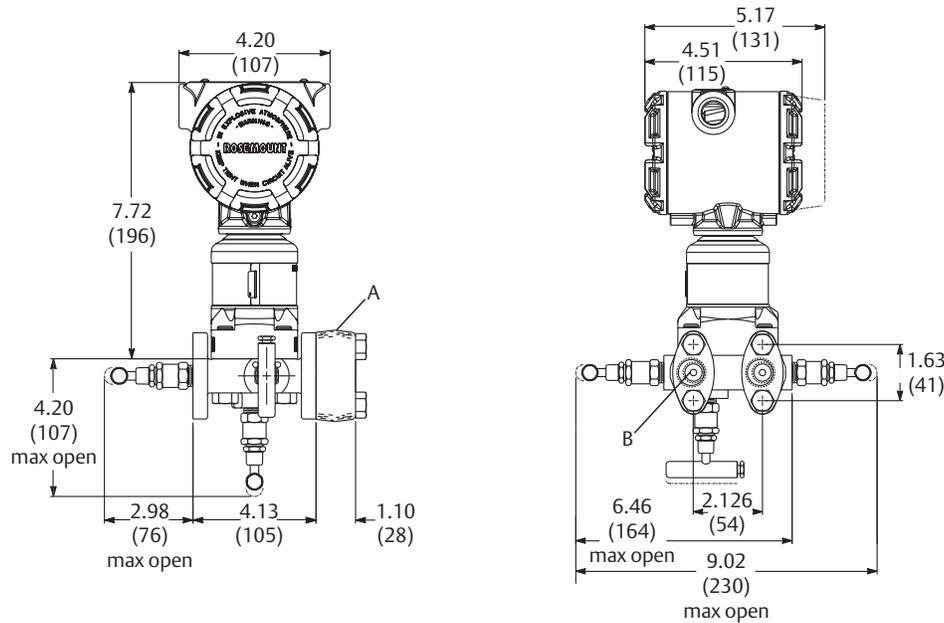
Rosemount 305RM 3-Valve Traditional DIN Style Manifold
